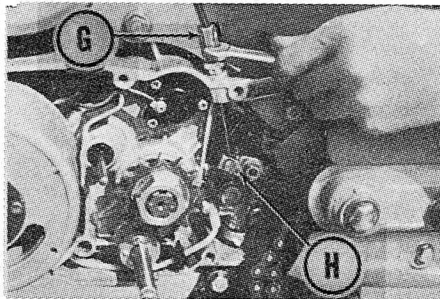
With the throttle at full open, turn cable guide (G) until hole (H) in lever is aligned with mark on pump body.
